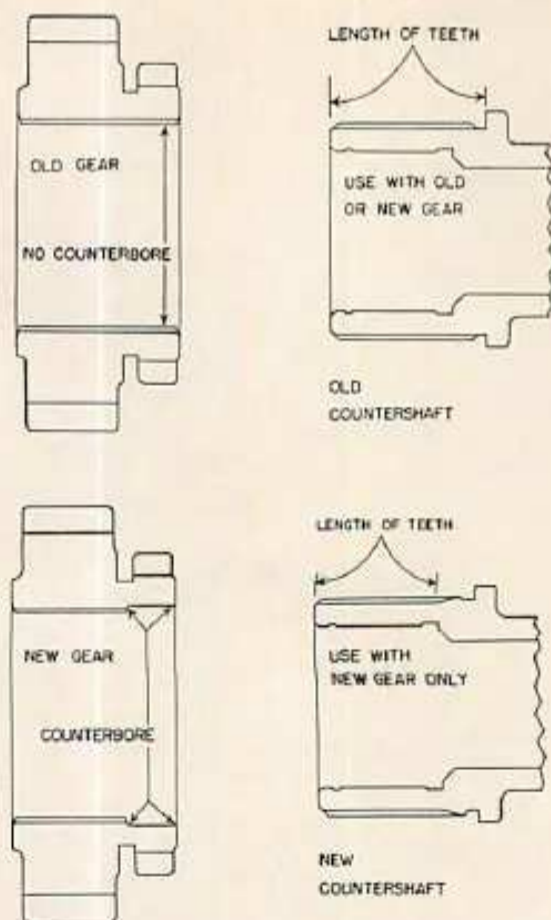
When servicing Hydra-Power drive on series 1600, be sure to use correct countershafts and double gears as shown.
